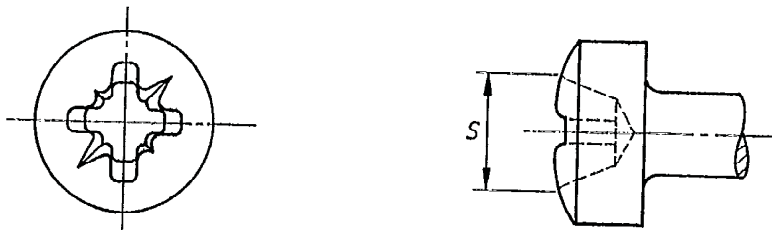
Recessed raised cheese head machine screws: enlarged views of recess type V
